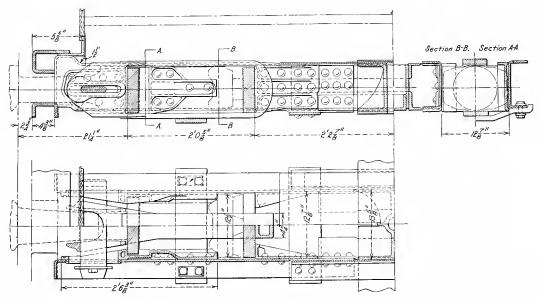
Universal Attachments and Yoke for Sessions Draft Gear, Type K. Universal Draft Gear Attachment Company.
